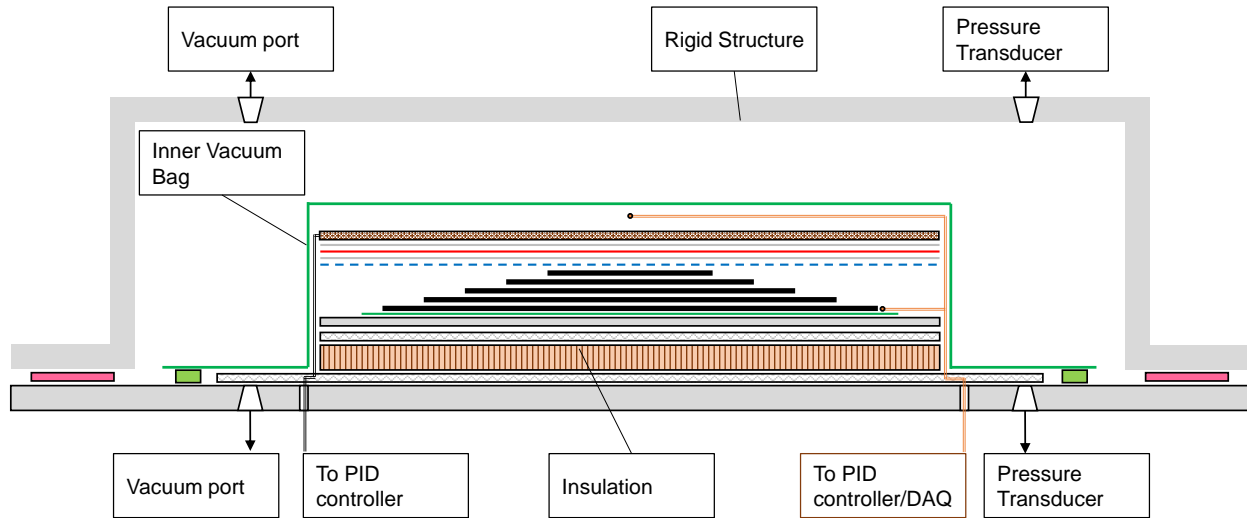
DVD fixture, showing patch underneath a heat blanket inside the inner vacuum bag.
